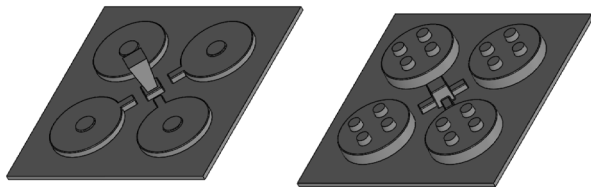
A CAD model showing the layout of the four-impression test pattern.
